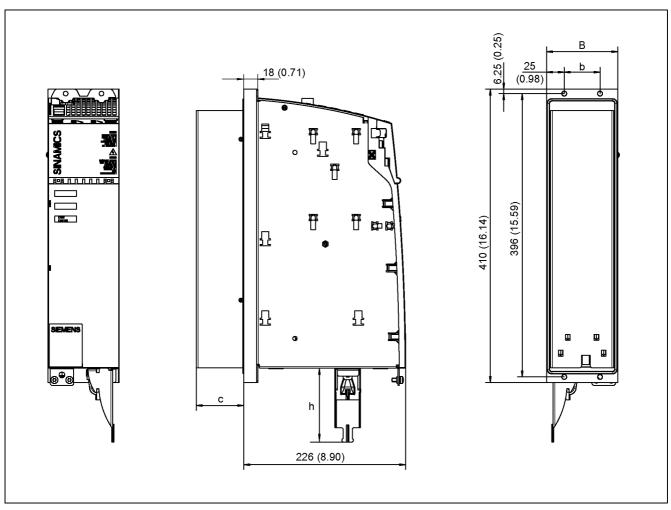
Dimension drawing of Motor Module with external air cooling 30 A and 2 x 18 A
